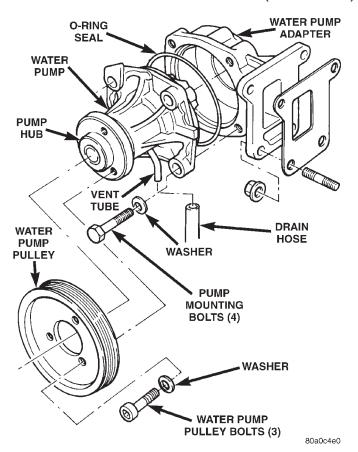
WATER PUMP REMOVAL/INSTALL— TYPICAL
